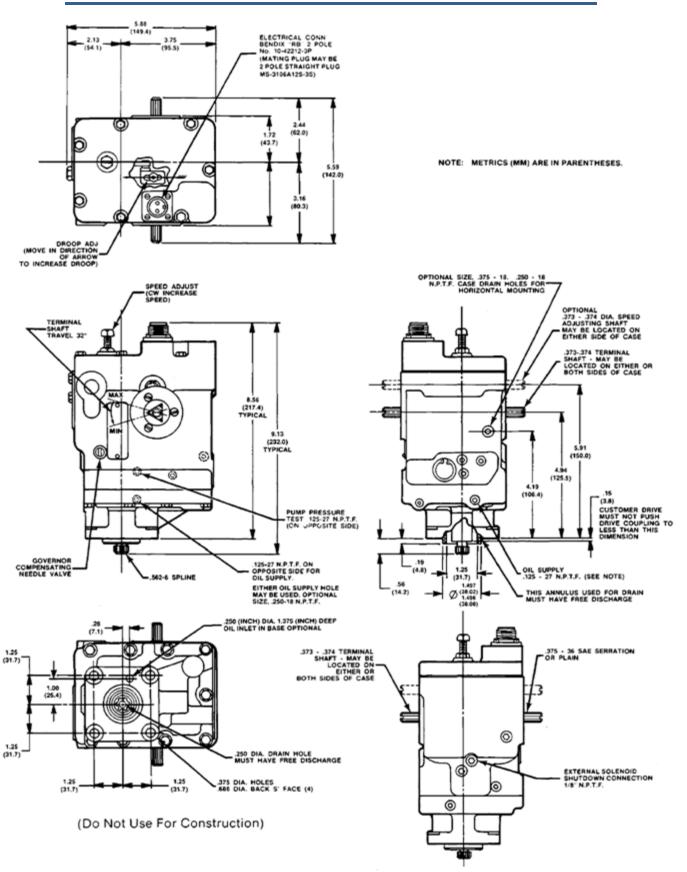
EGB-2C Governor/Actuator Outline Drawing
